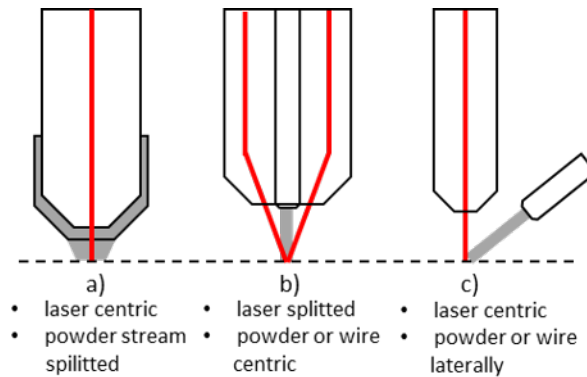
LMD head configurations: (a) fibre guided system with coaxial powder nozzle (b); inverted arrangement system with centric material feed and (c); conventional welding head with lateral material feed
